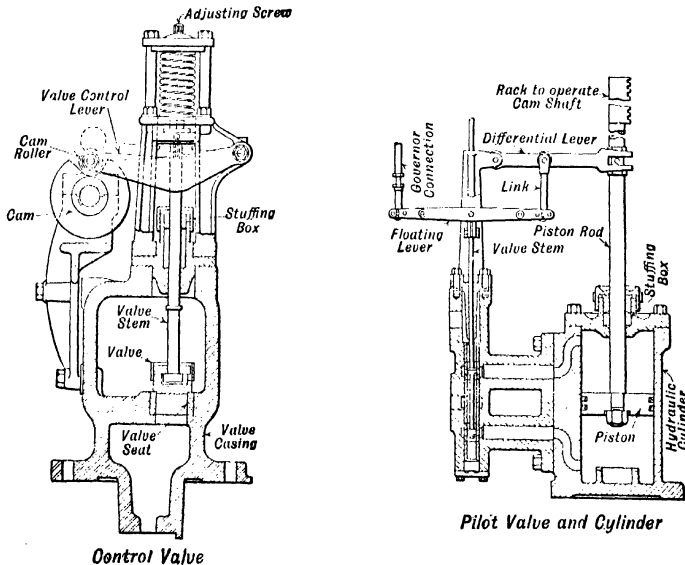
Hydraulic-operated Control Valve with operating Cylinder and Pilot Valve.
